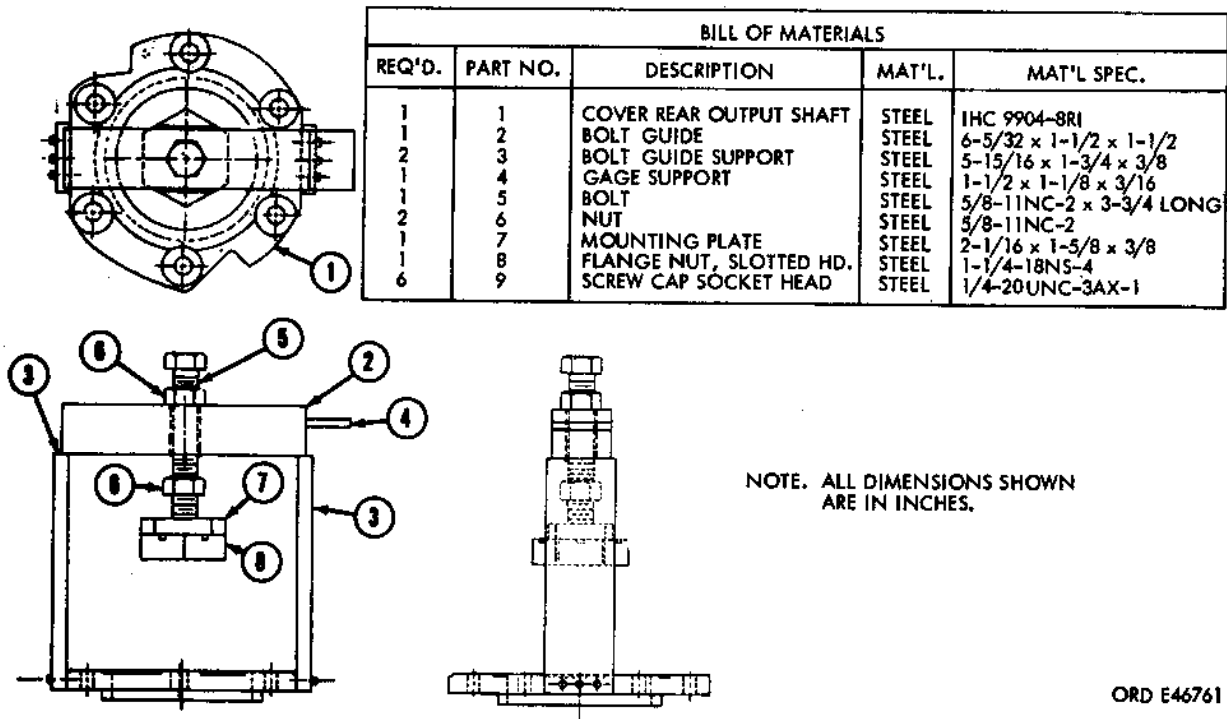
Assembling adjusting fixture for intermediate shaft bearings
